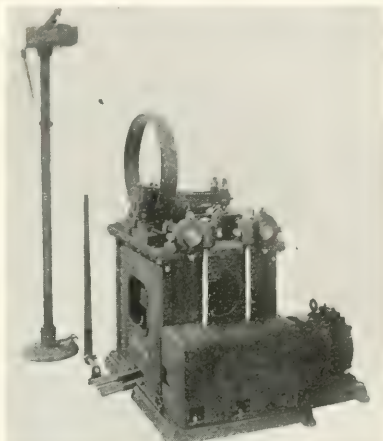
ELECTRIC WELDER FOR AUTOMO-
